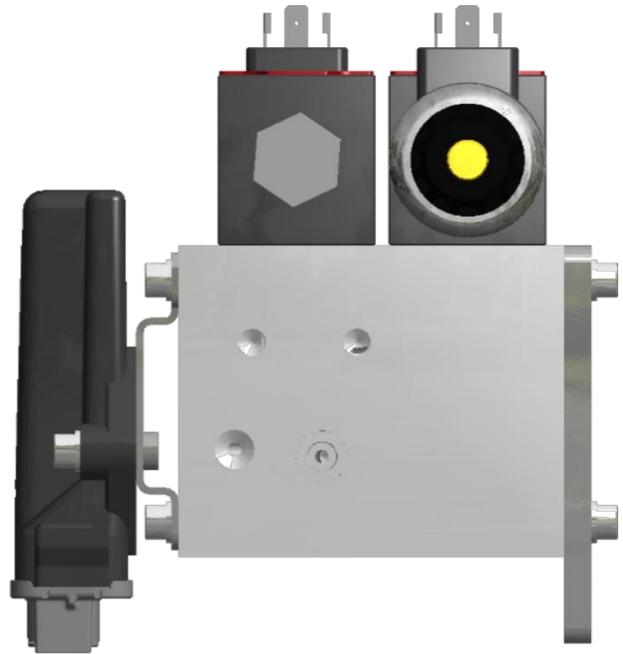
SIDE VIEW OF THE HYDRAULIC DRIVE UNIT TO THE MANIFOLD
